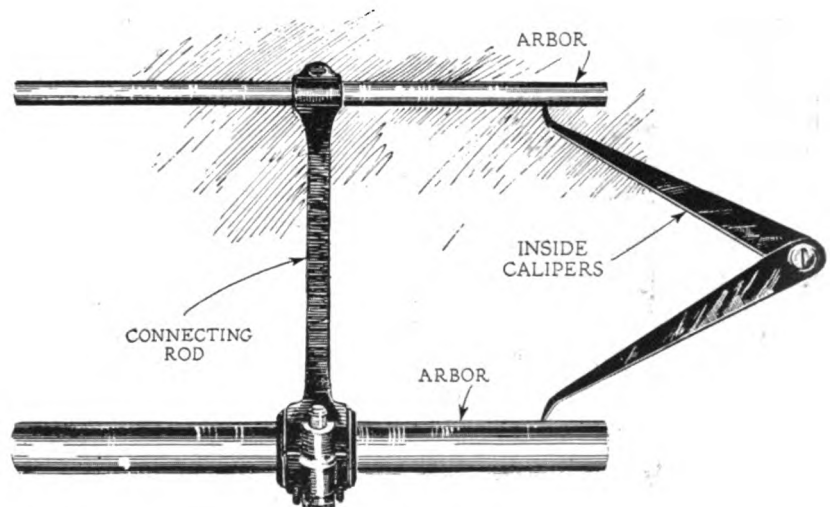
Although there are a number of stock jigs for making this test of parallelism of the connecting rod holes, the test can be carried out in this manner
